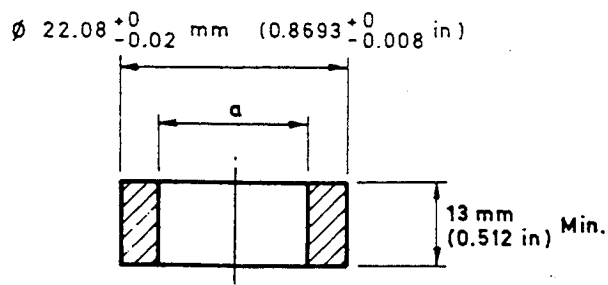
Gauge ring for outer contact of socket connector (for dimension 'a' see Table 4).
